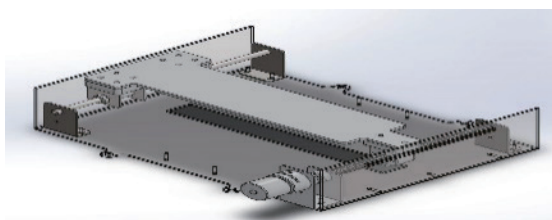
(Color online) Assembly drawing of feeding mechanism.
